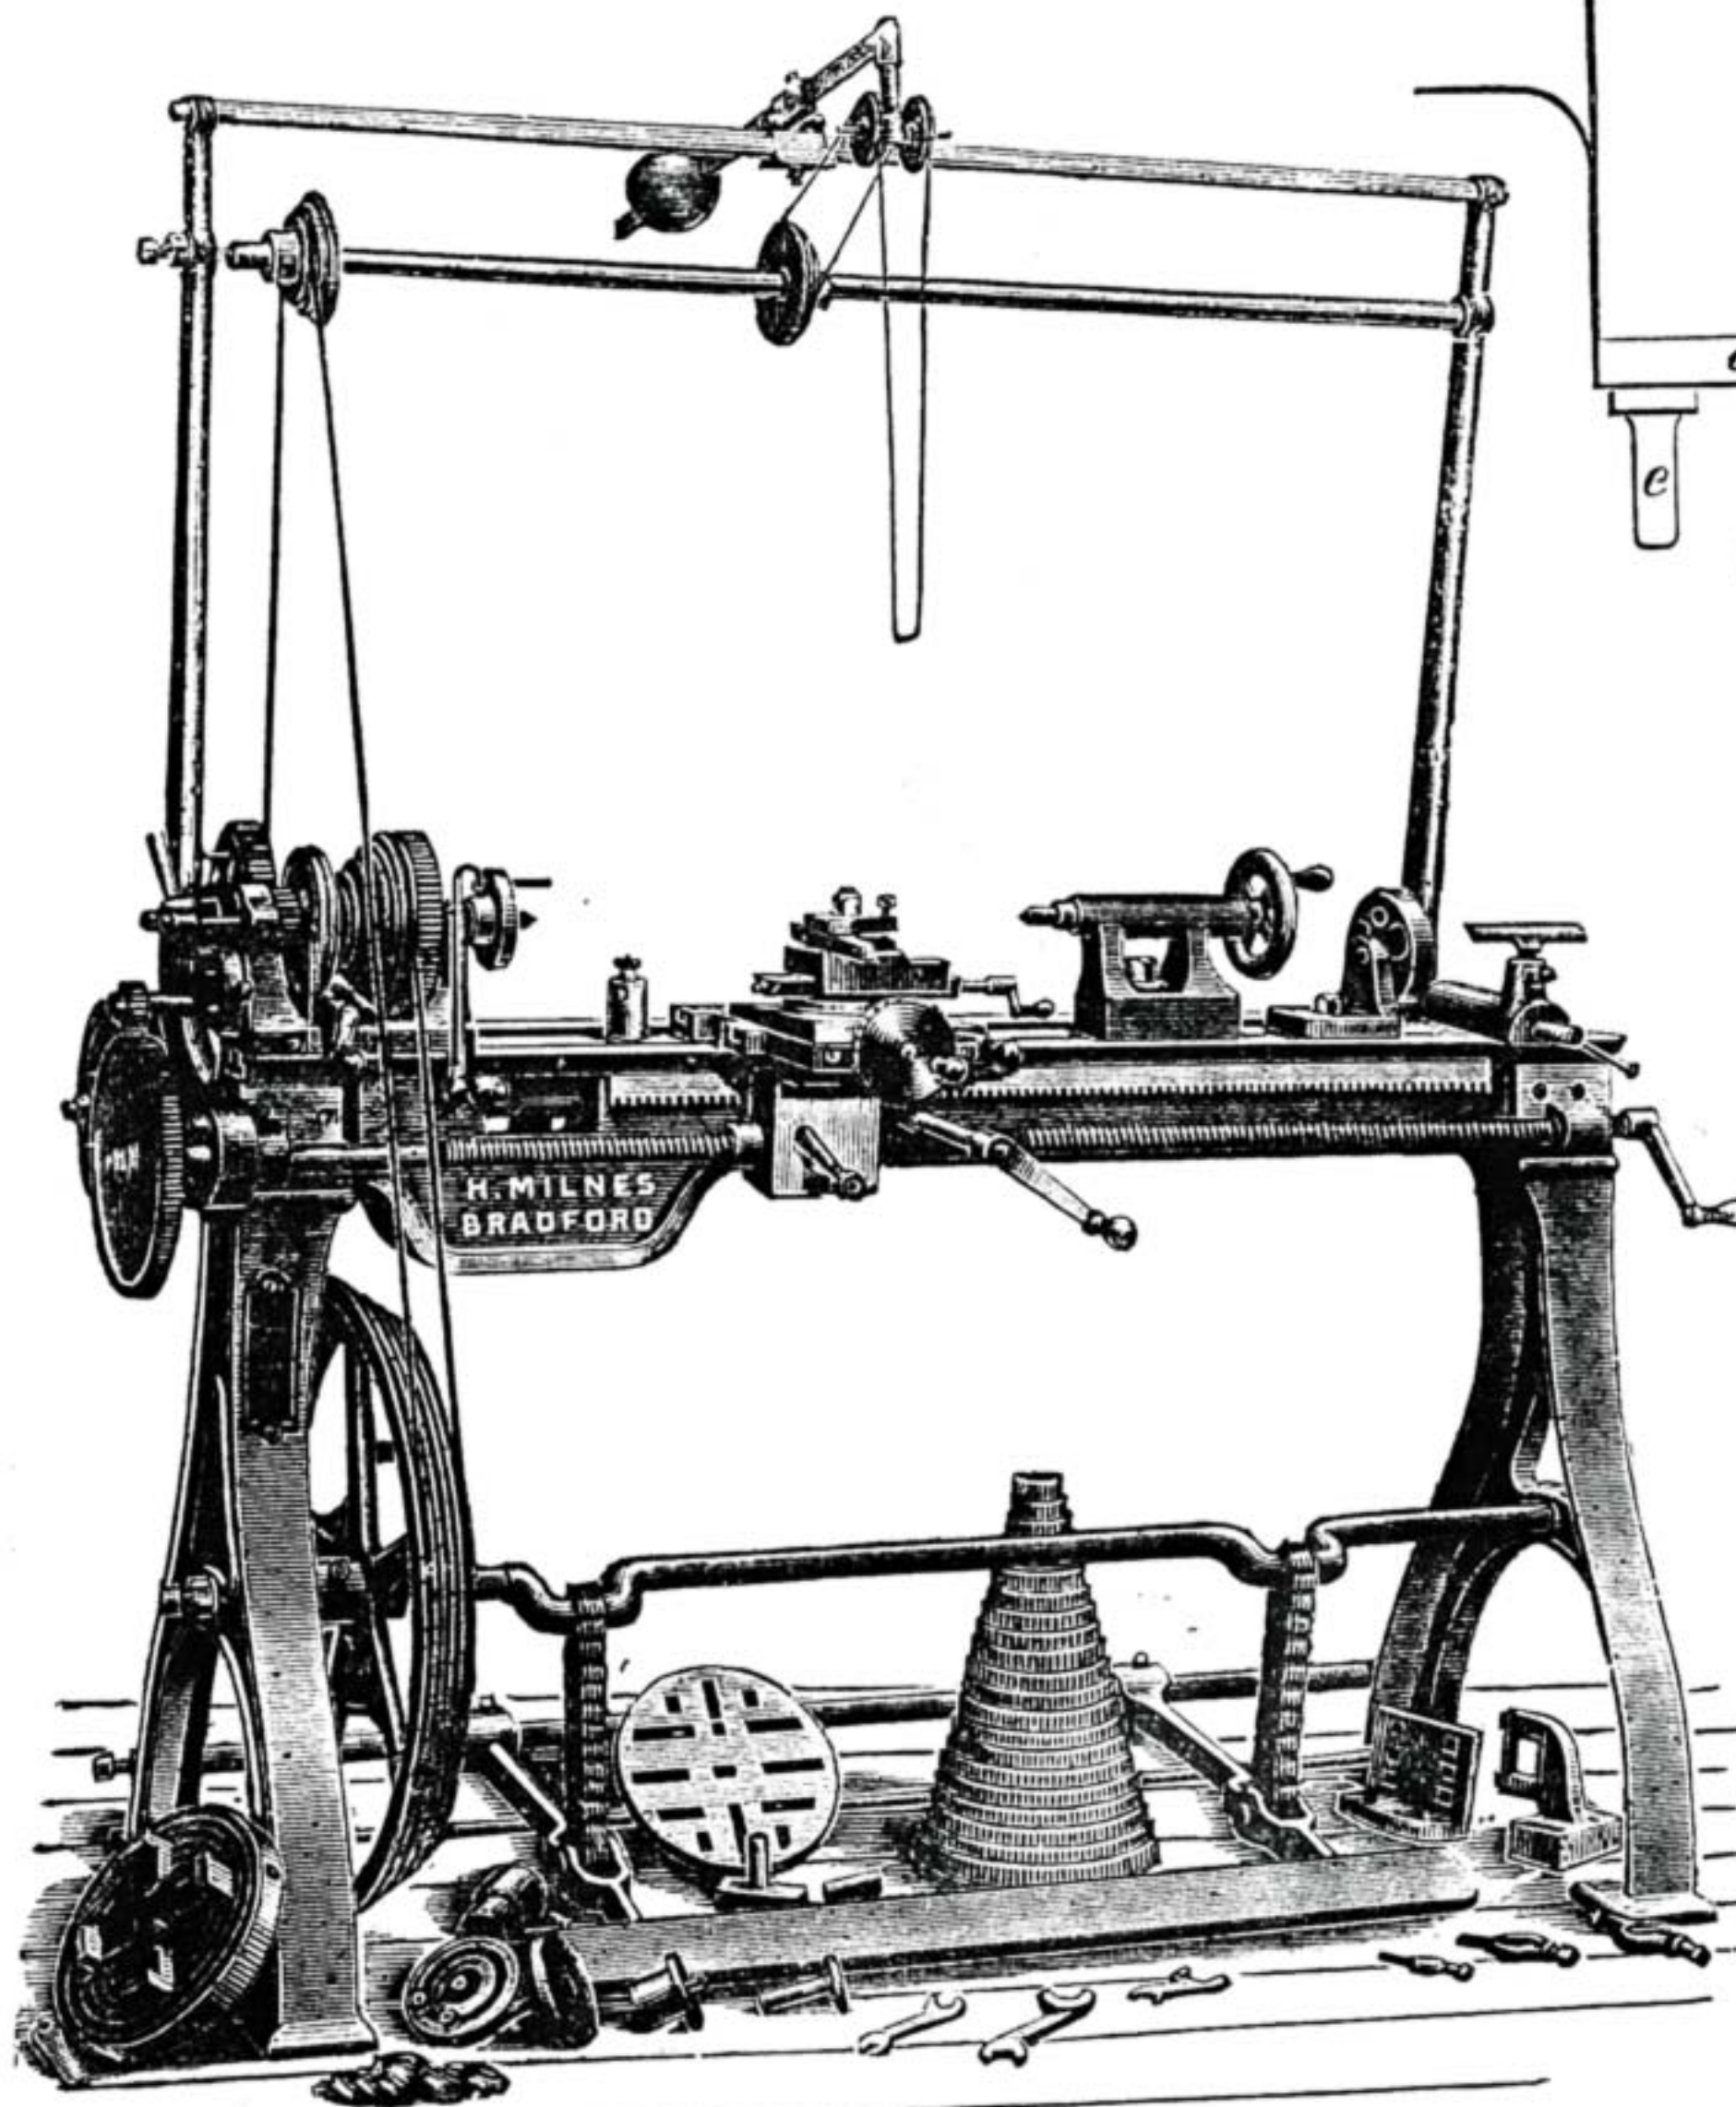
Milnes' Self-Acting Slide and Screw-Cutting Lathe for Foot Power.
